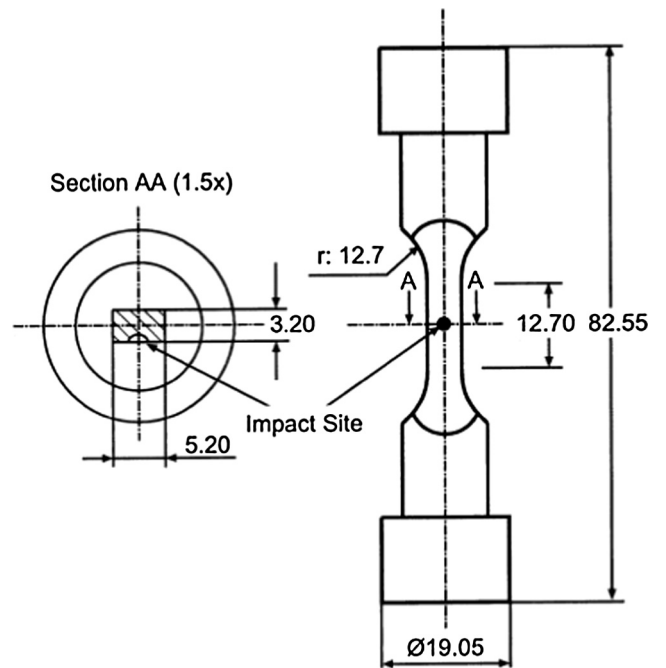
The geometry of the specimen (all dimensions are in mm) [8].
